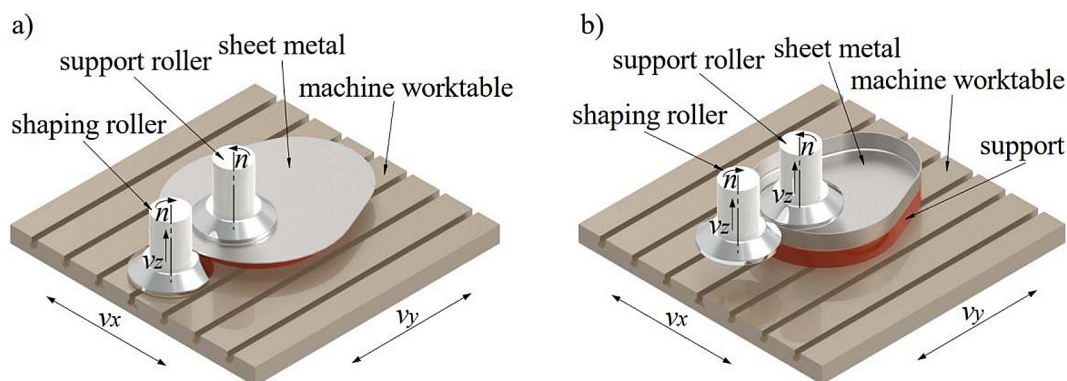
Proposed incremental forming technology: (a) initial stage of the process, (b) final stage of the process with the shaped product visible
